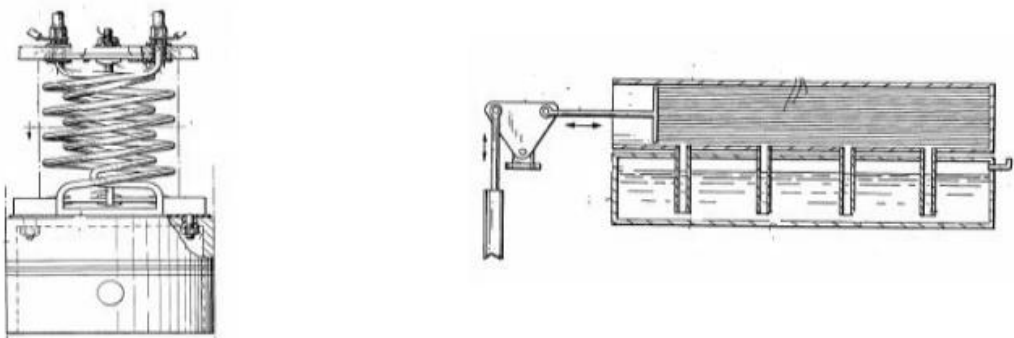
Conceptual Design Hollow Gear Engine (Left) and Tubular Gear Engine (Right)
